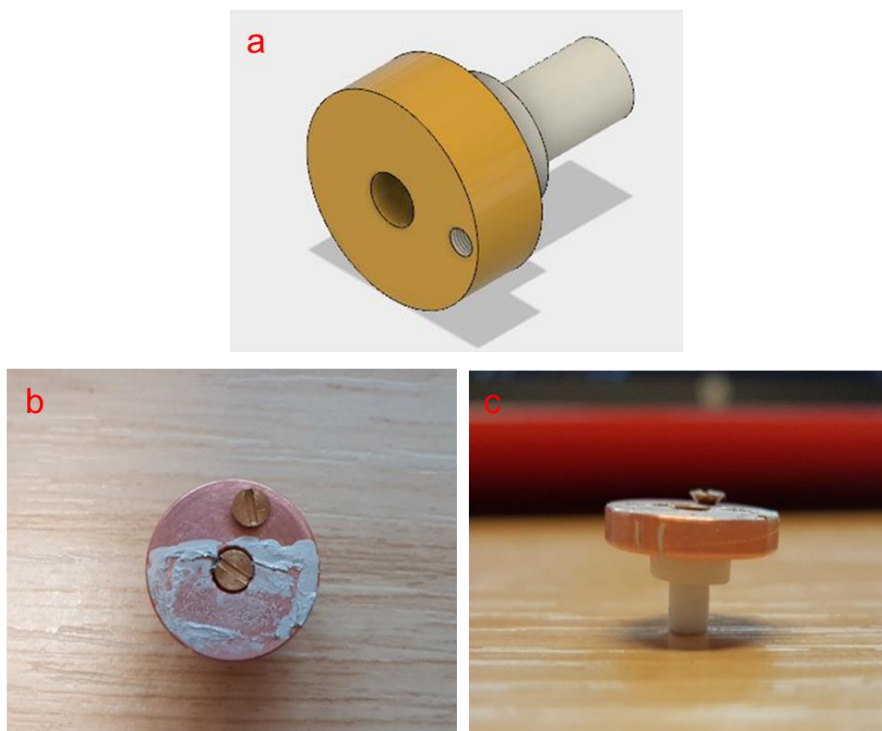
(a) 3d view of version-1 of the cryo-stage, (b) and (c) top and side view of the version-1 after fabrication
